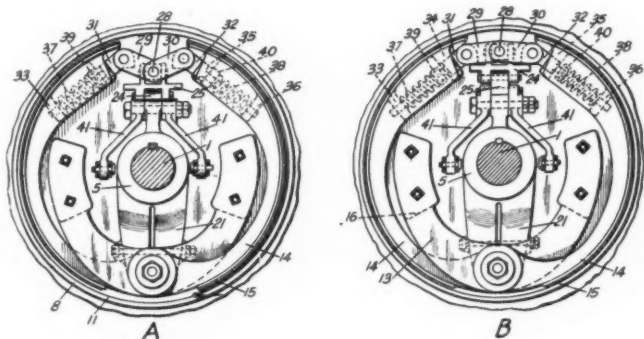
Coil springs compensate for expansion of clutch parts when heat is generated in operation
